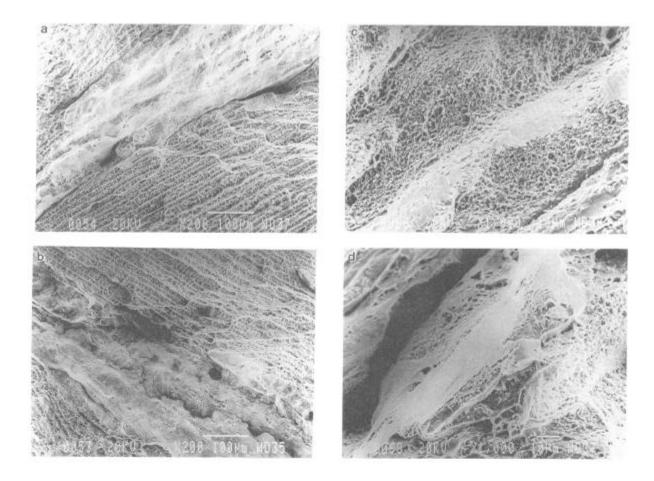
Fracture surface of all-weld-metal tensile specimen in (a), (b): as welded and in (c), (d): PWHT condition.
